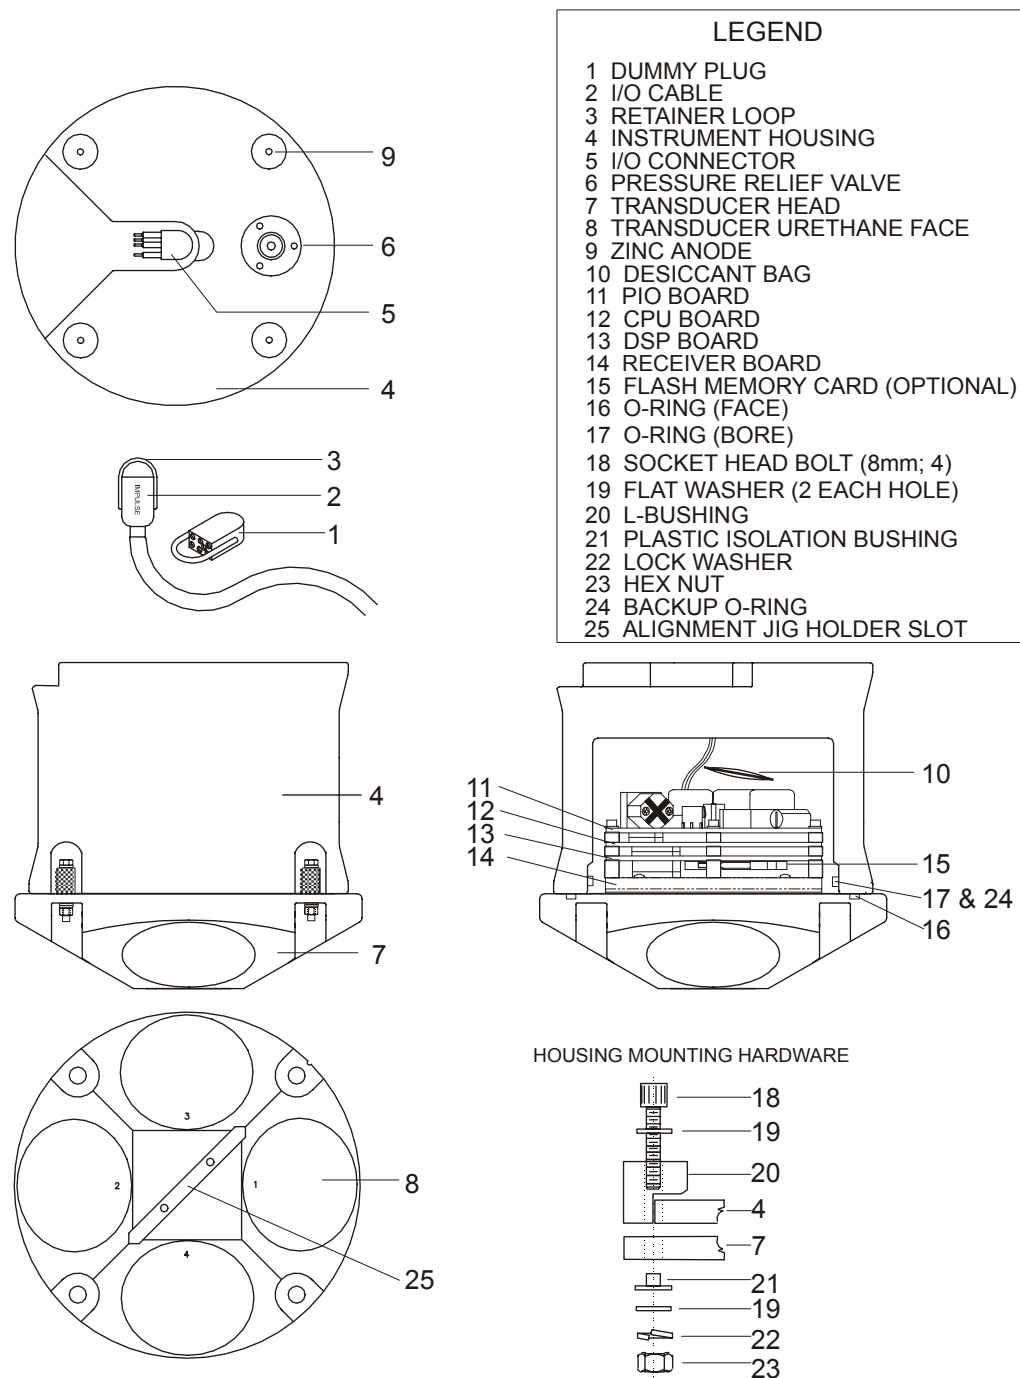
300/600kHz Navigator Parts Location (3000/6000 meter Housing)
